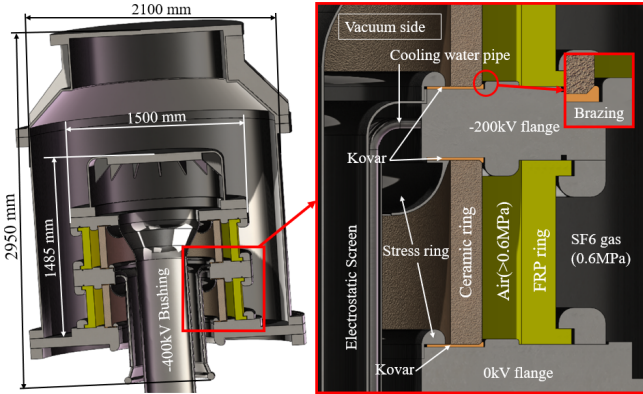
Cross sectional view of CRAFT NNBI HV bushing.
